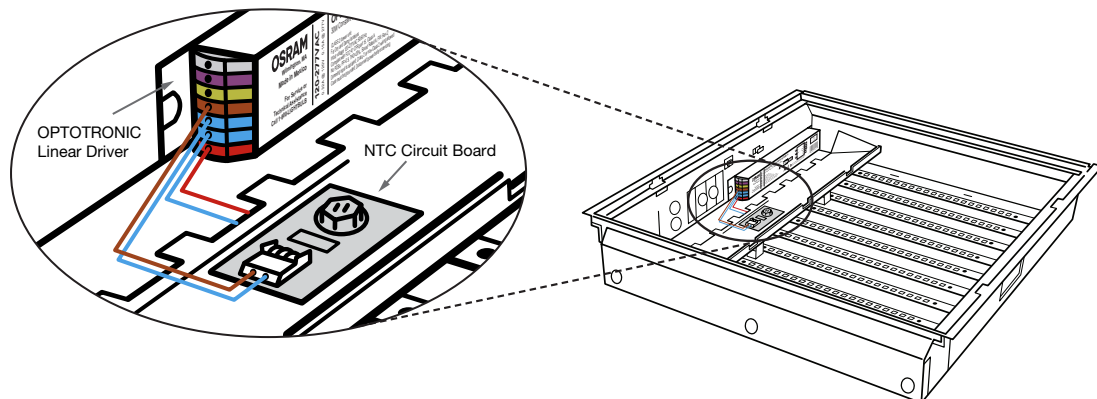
Example of fixture assembly using OPTOTRONIC Linear Driver along with an NTC
